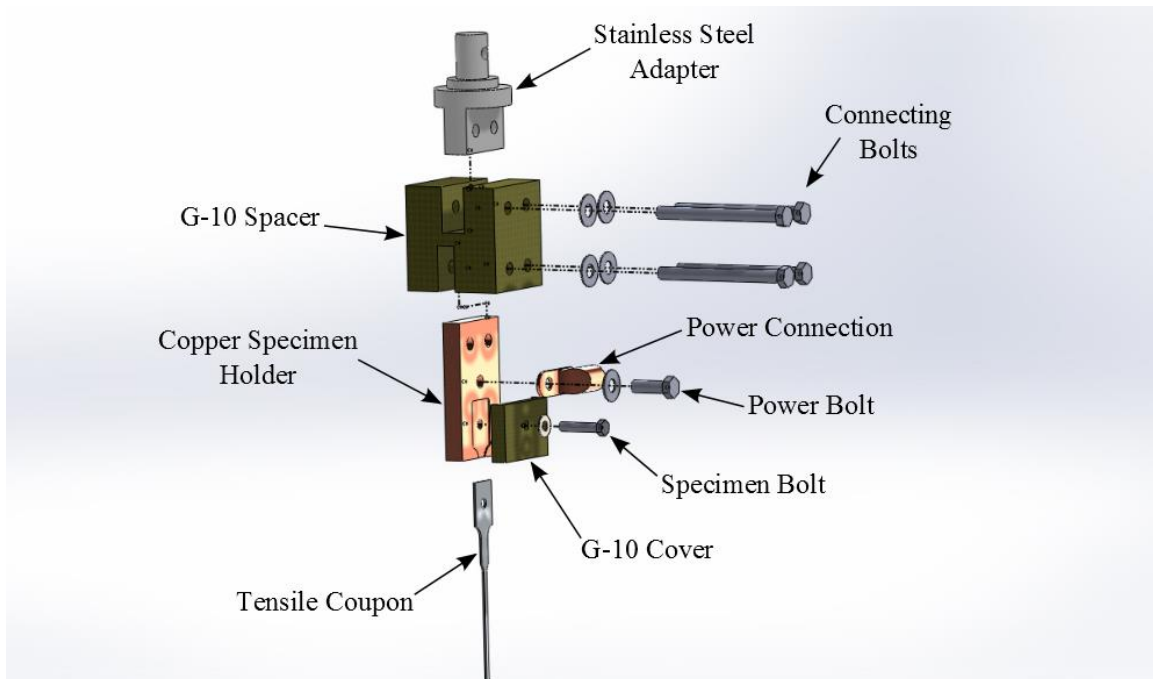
3-D exploded assembly view of the direct resistance heating grips.
